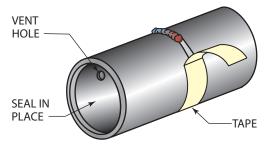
Using a special tape to cover the unwelded part of a pipe joint will reduce the need for high flow rates for the backing gas.
